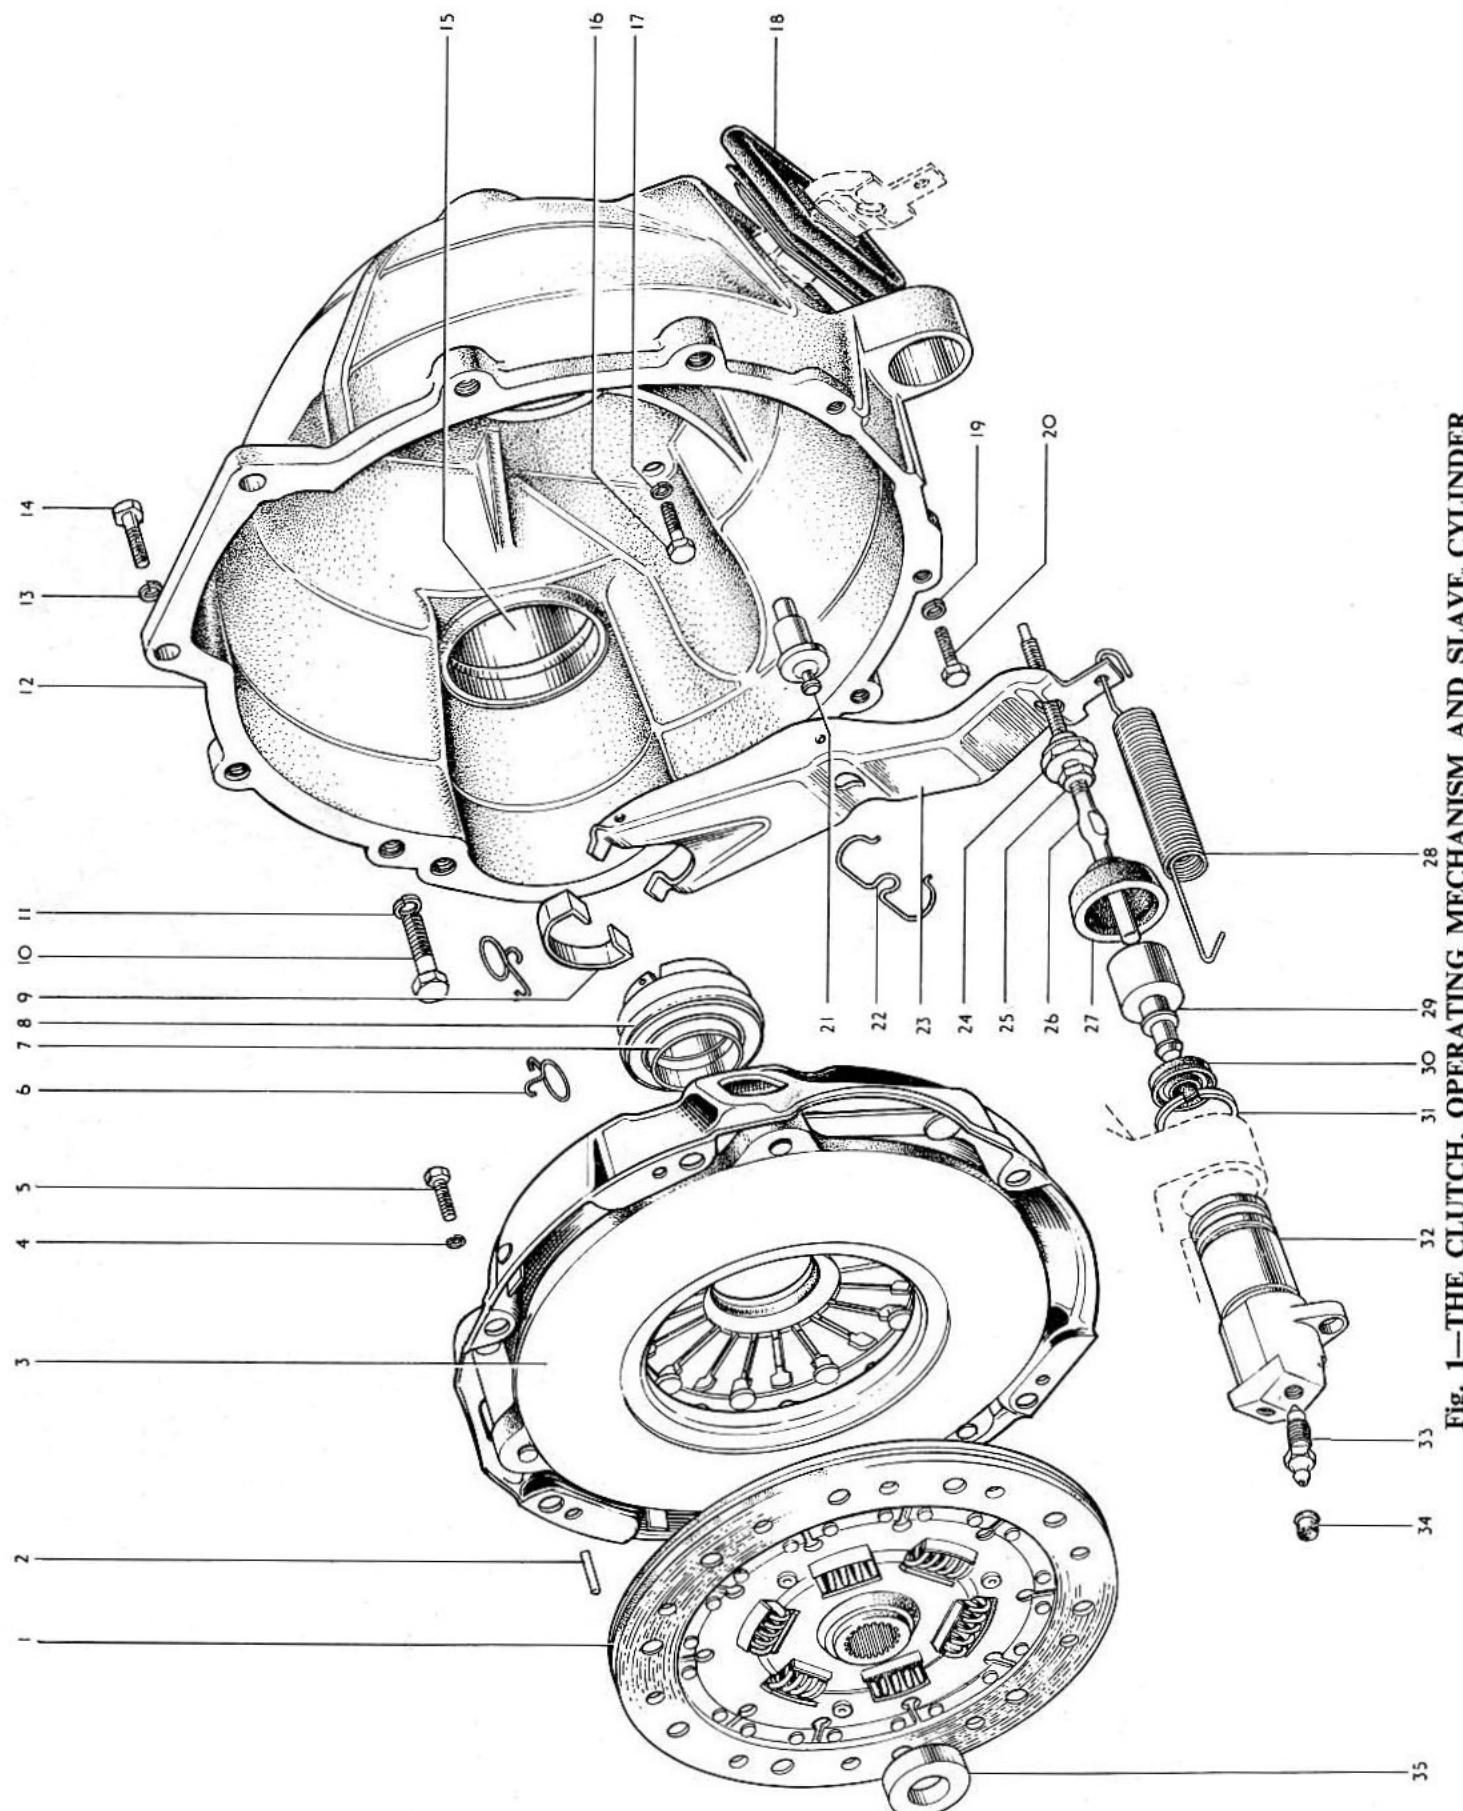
THE CLUTCH, OPERATING MECHANISM AND SLAVE CYLINDER
